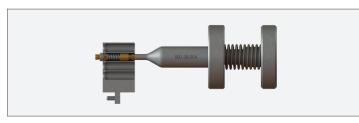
Bullet Removed From Contact. Uses Tool PN 500-32-007.
